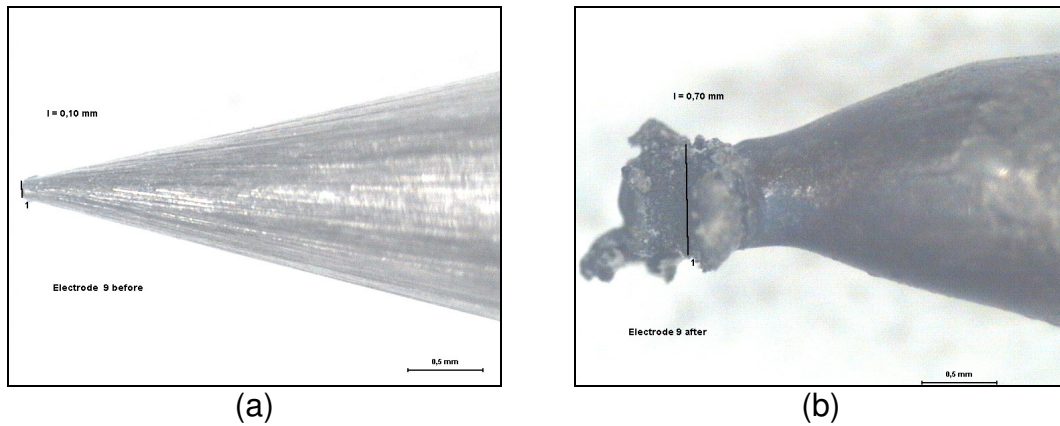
Angle of Electrode 9 used for experiment number 9: (a) before welding $\leq 33.77^\circ$; (b) after welding $\leq 56.56^\circ$.
